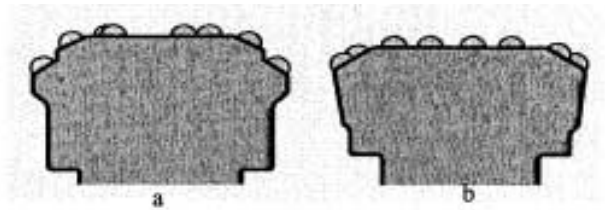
Air hammer bit face profile designs, a) step gauge bit, and b) double gauge bit (courtesy AB Sandvik Rock Tools).
